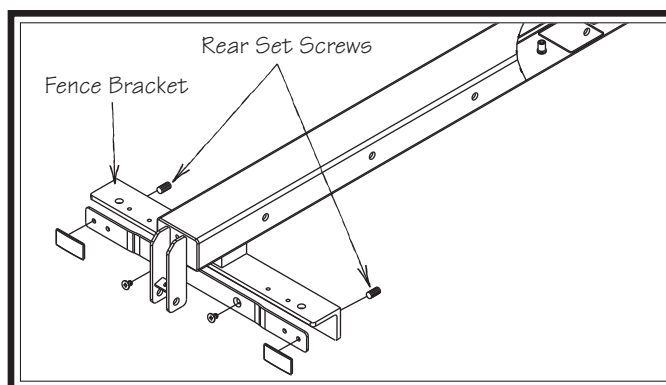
Location of set screws used to adjust fence parallelism and clamping pressure.
